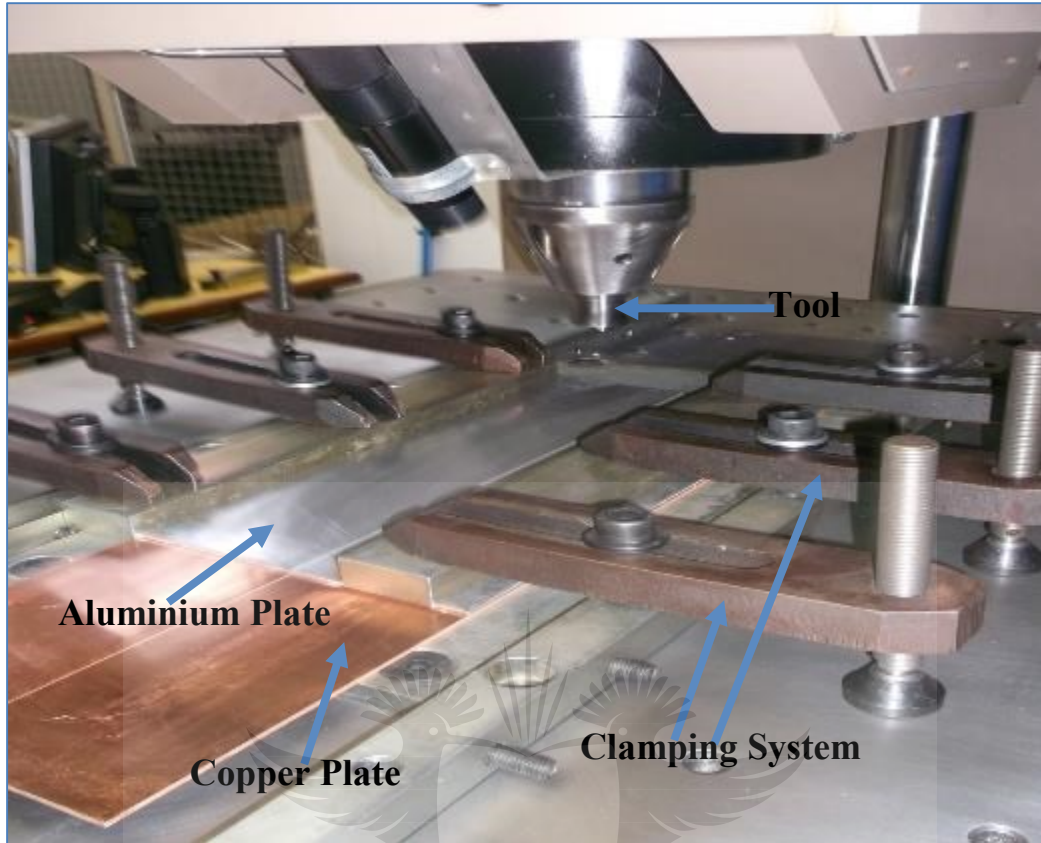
Showing the backing plate, the tool holder, the tool, the aluminium plate, copper plate and the clamping system
